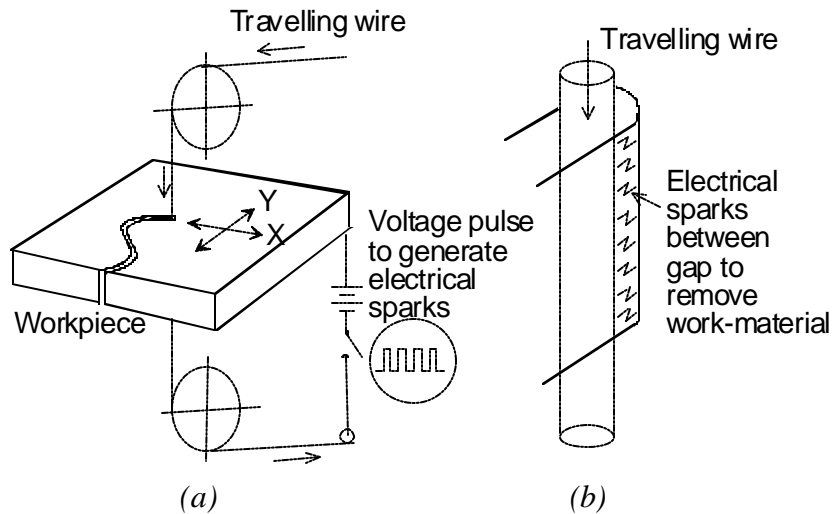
The wire EDM process, (a) conventional 2D wire EDM operation, (b) enlarged view of the wire and workpiece
